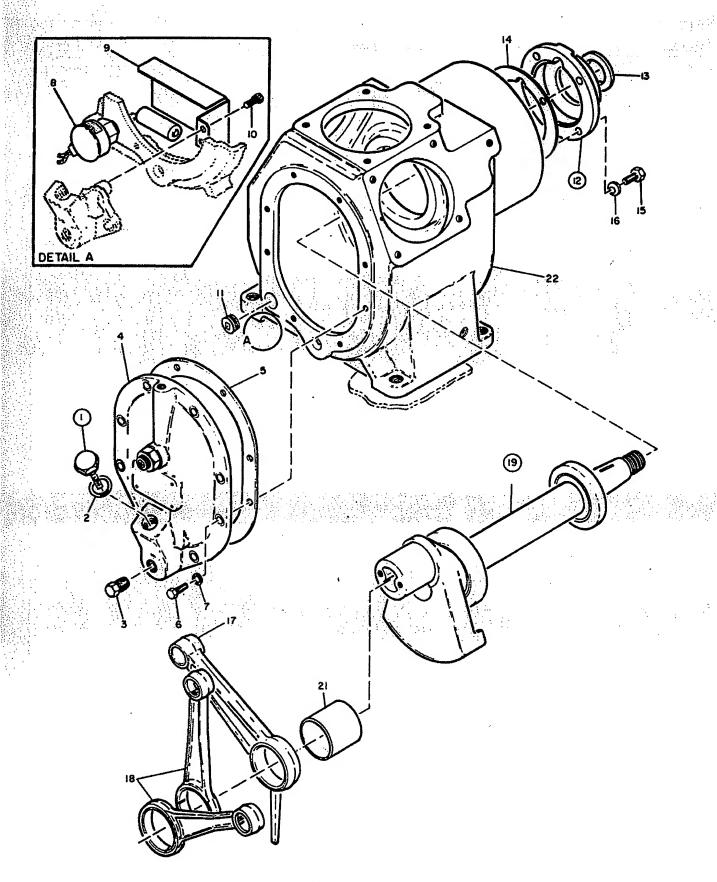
COMPRESSOR FRAME ASSEMBLY
